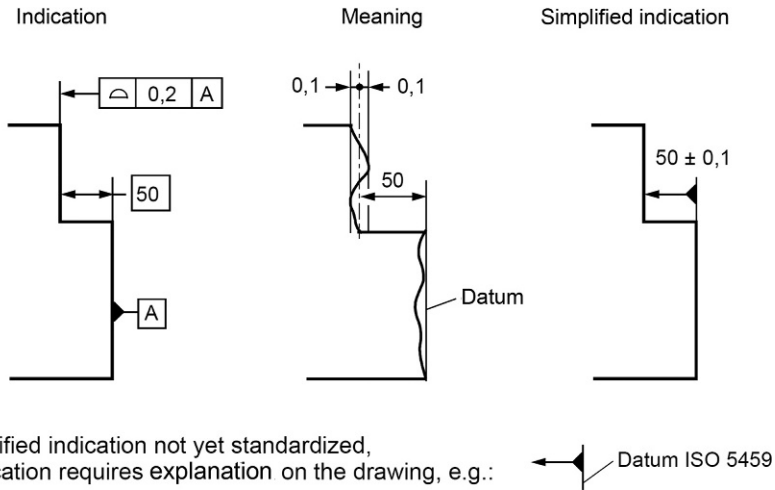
Step dimension tolerancing, simplified drawing indication
